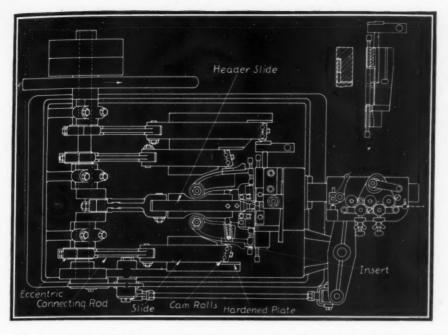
Plan of nail machine showing eccentrics which replaced cams used on earlier model
